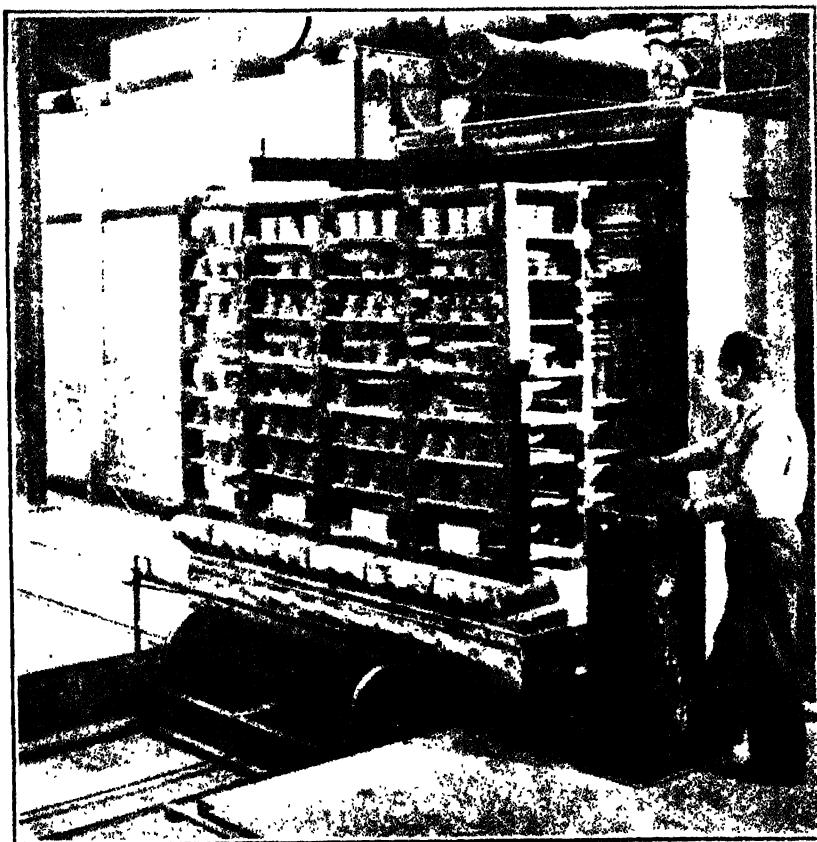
A rack of ceramic insulator bodies arranged for firing and being moved into a batch furnace.
